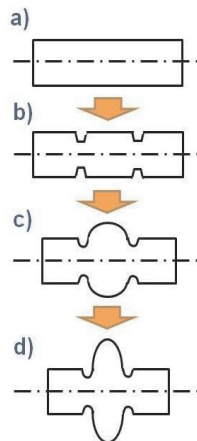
Schematic diagram of manufacturing process of seamless cavity. a) seamless elementary tube, b) after necking, c) after 50% hydroforming, d) after final hydroforming.
